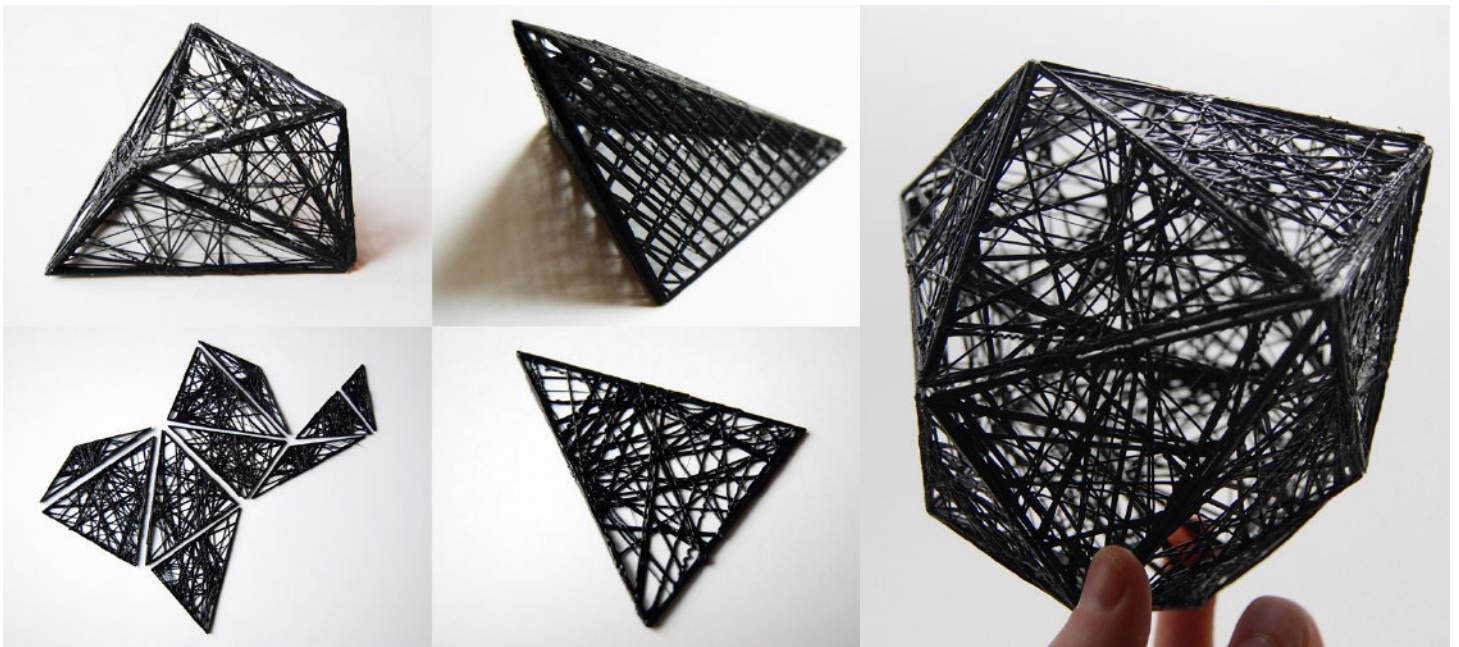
Encoded Matter: Pushing Machine Limits
